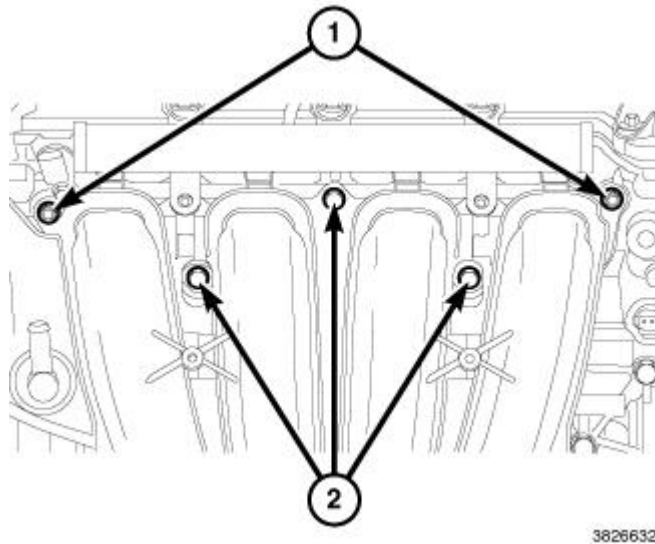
Intake Manifold Retaining Bolts & Nuts
